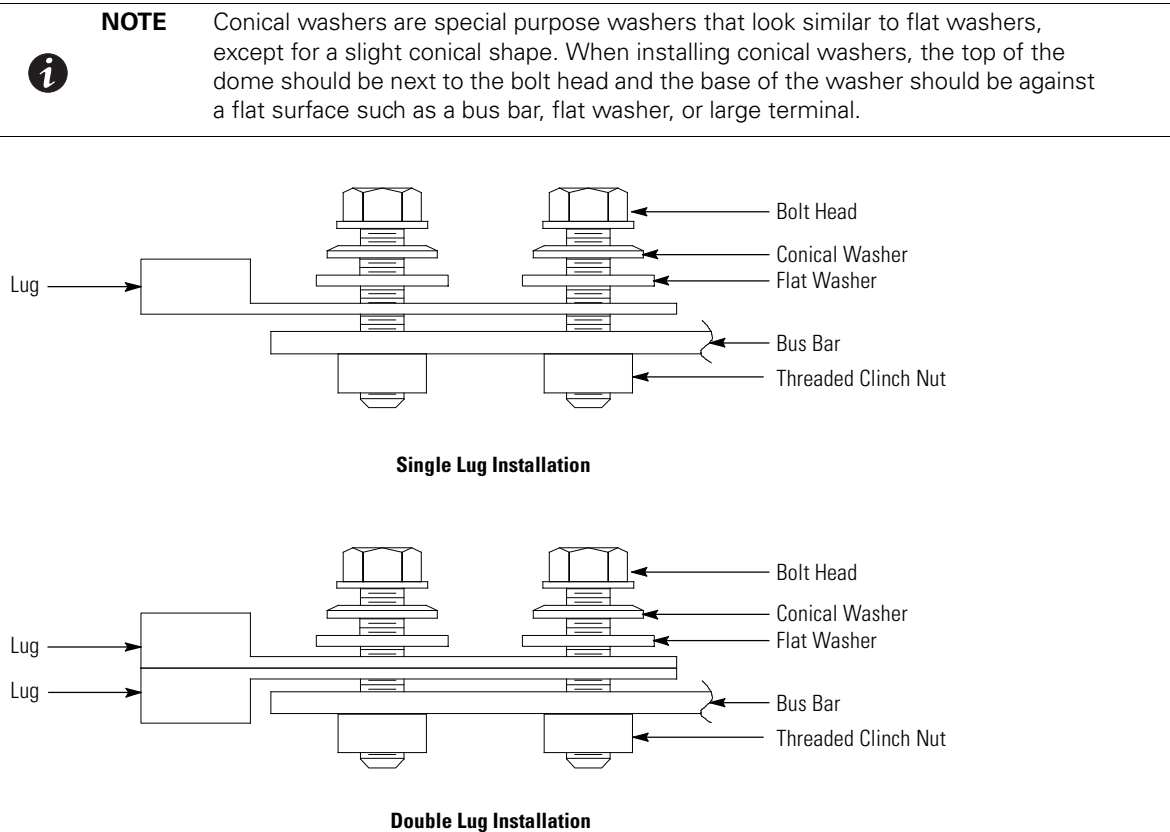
Typical Bus Bar Barrel Lug Mounting – Hardware Assembly Sequence
